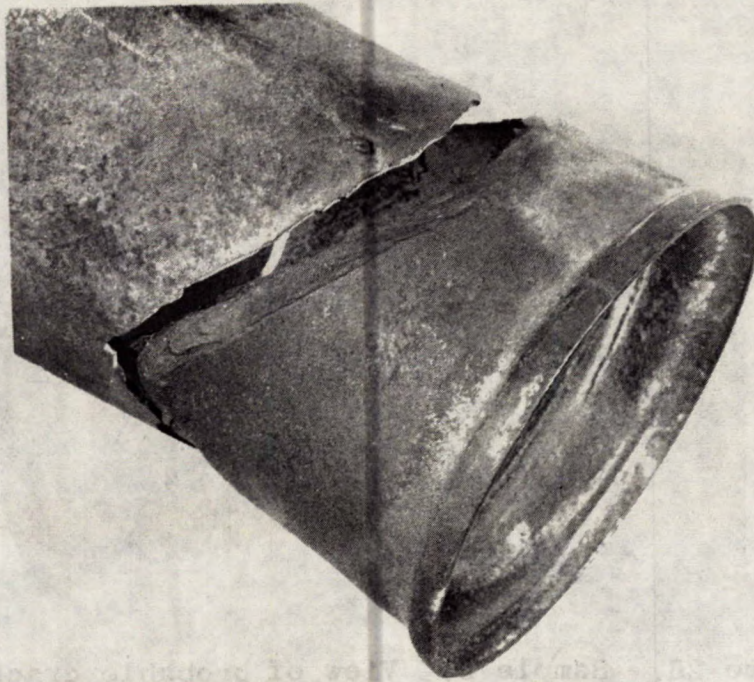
Sample E. View of probable crack initiation location at toe of fillet weld. Approx. full size.
